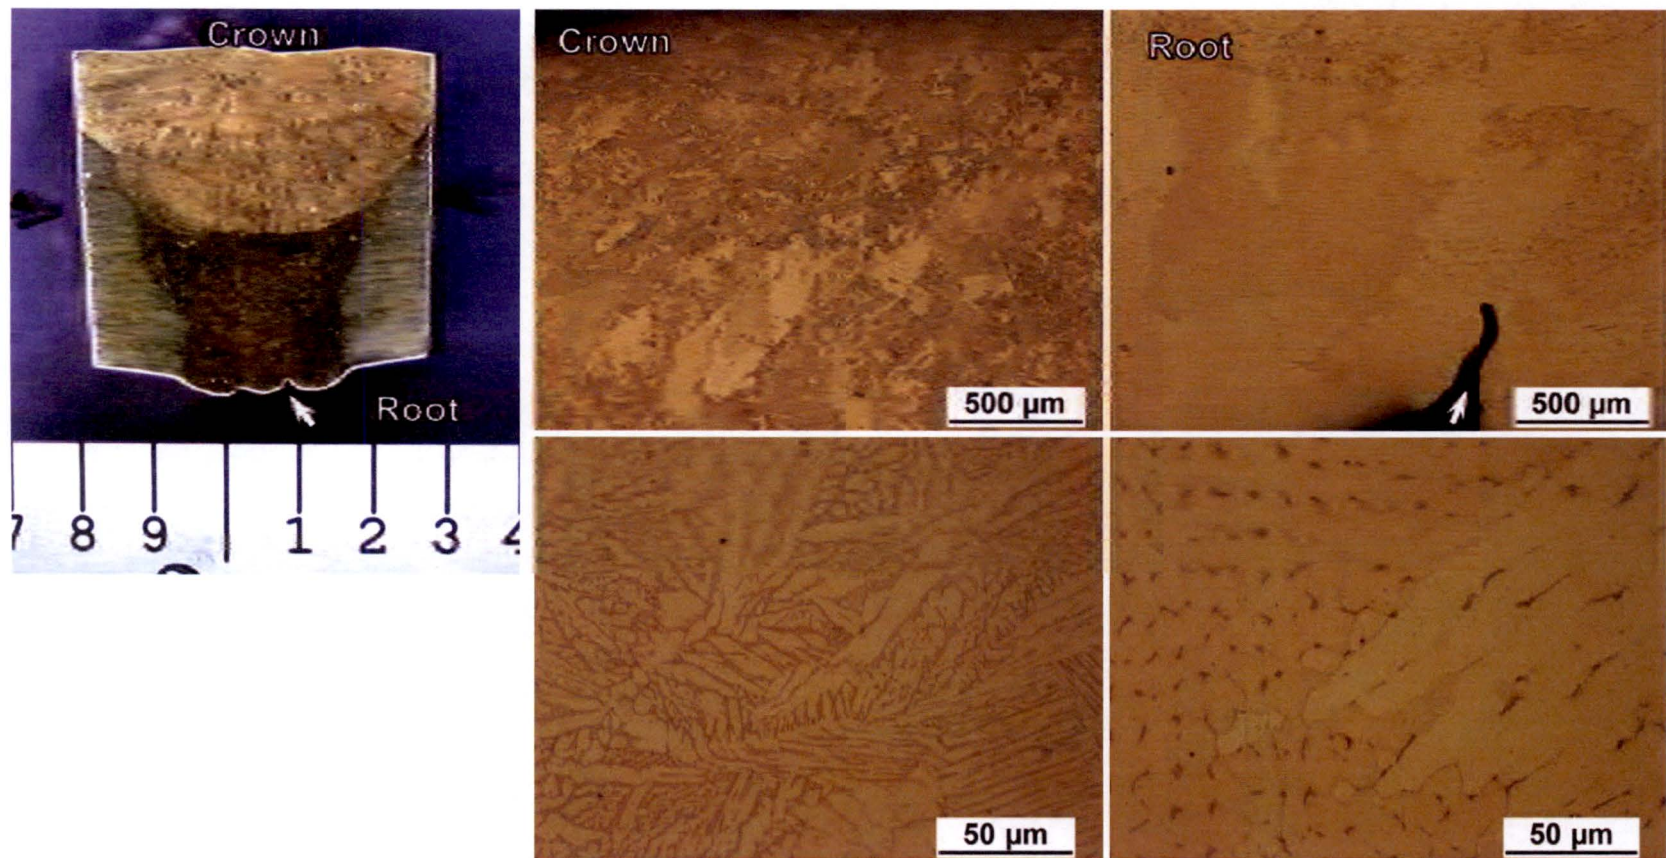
Bend Test Specimen, Sample C1, from a 30-Inch Pipe Field Mockup Weld after Testing to Failure and Corresponding Metallographic Cross-Section Showing Weld/HAZ/Base Metal Microstructure of the Ductile Fracture Region.
